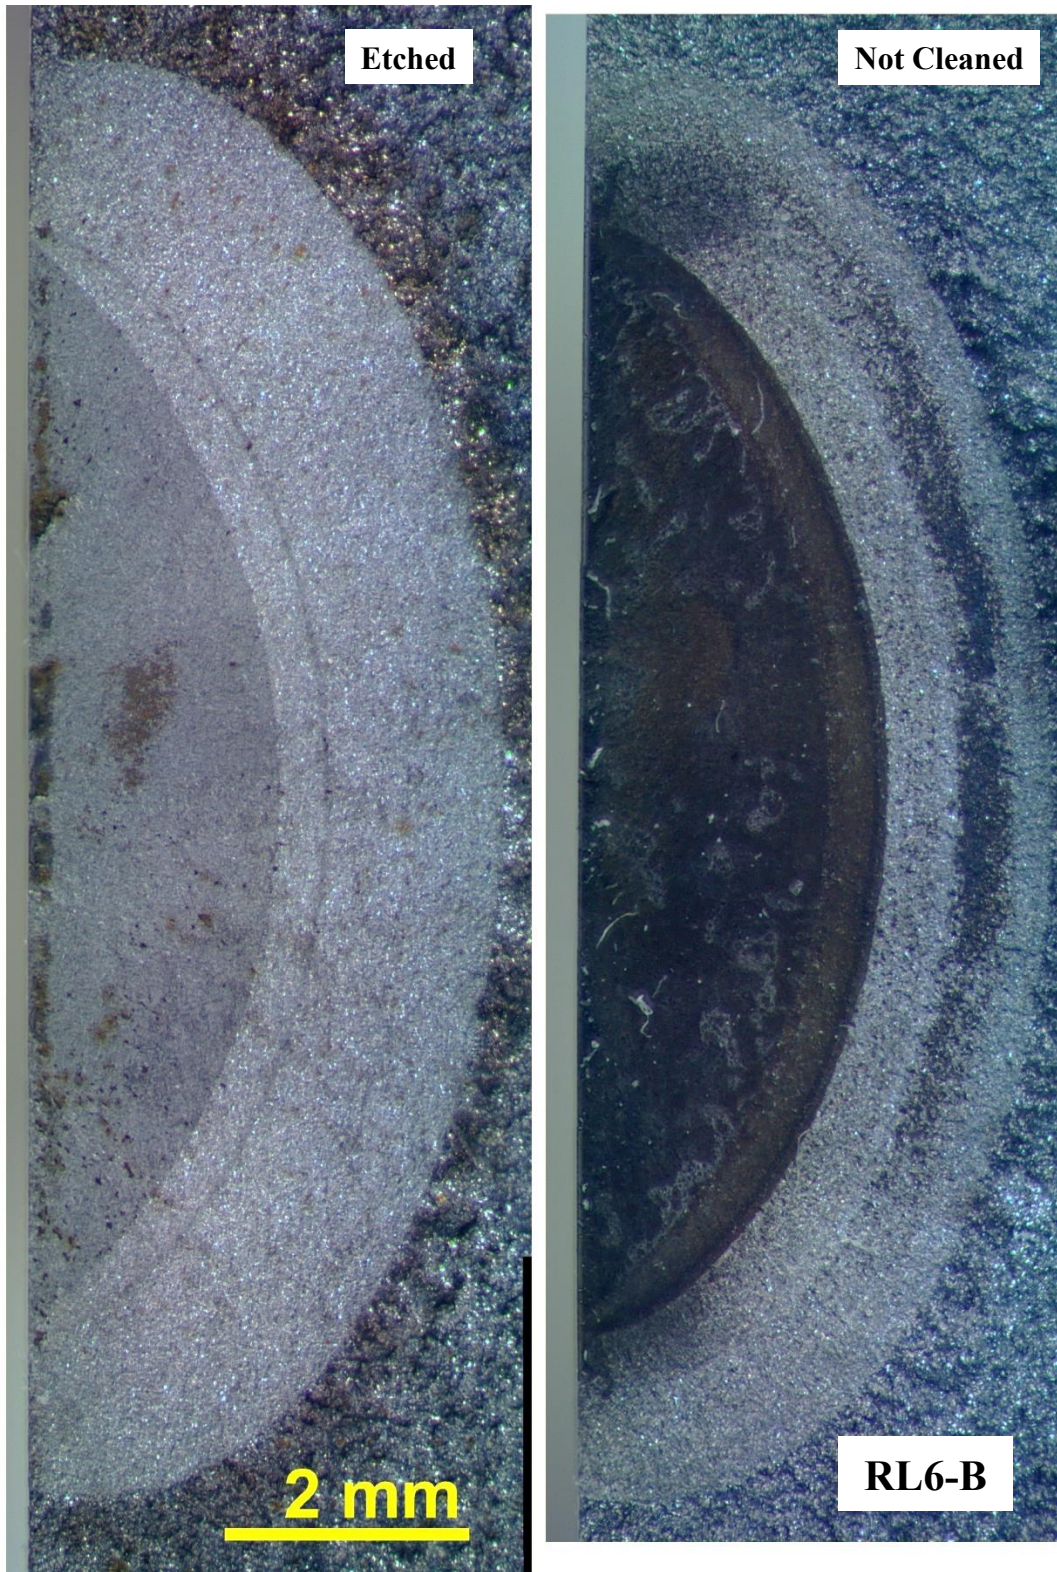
Fractograph for RL6-B. Imaged with a stereomicroscope. On the left is an etched fracture surface. On the right is a fracture surface that has not undergone cleaning.
